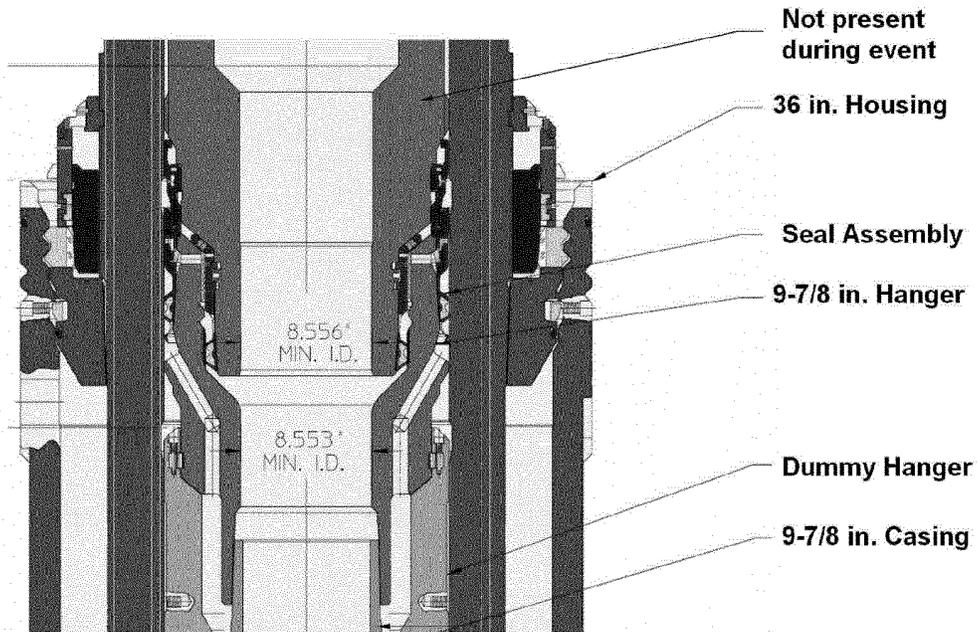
Schematic of 18-3/4 in. Wellhead with 9-7/8 in. Hanger and Seal Assembly
